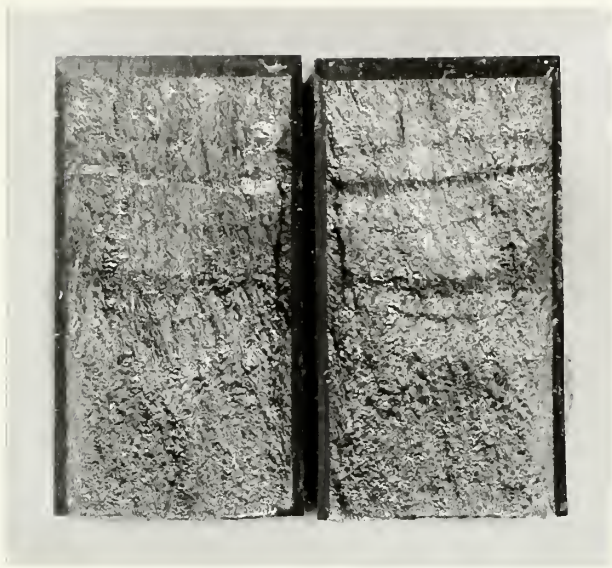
Stress-corrosion test specimens showing typical fractured surfaces. The uniformity of the fatigue cracks (resulting from the pre-cracking process) may be seen in the upper area of each specimen. Each horizontal striation delineates the base of a fatigue crack. The coarser, fibrous areas are those resulting from stress-corrosion and subsequent fast fracture.
